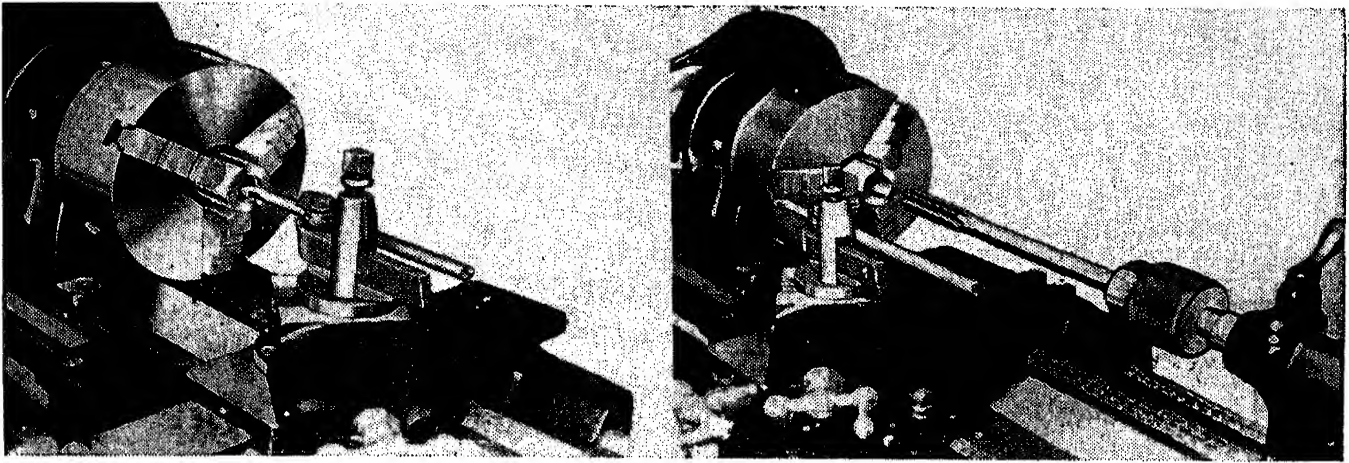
Boring and reaming a hole on a lathe. (Courtesy South Bend Lathe Works.)
